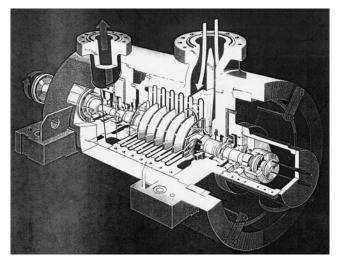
Barrel Compressor Assembly Drawing. (Courtesy Siemans/Demag Delaval)
